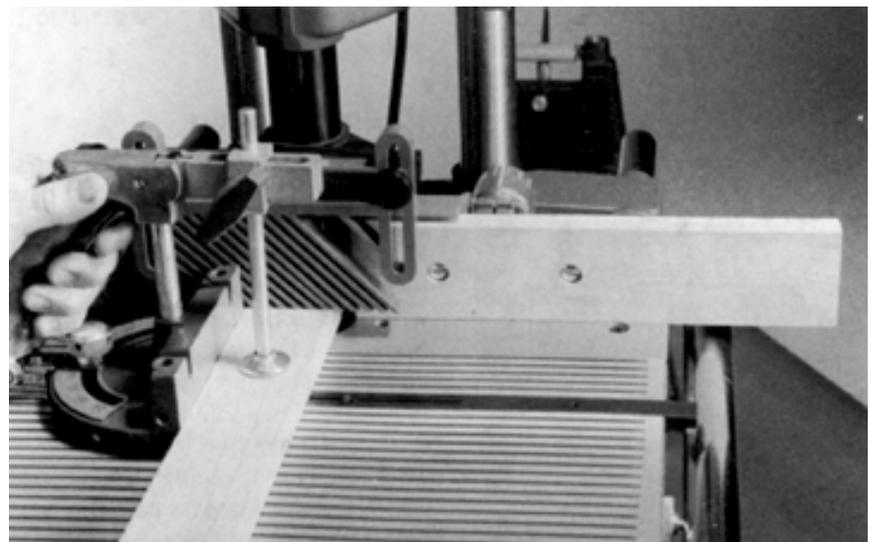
Unless the workpiece is wide enough to provide sufficient bearing surface against the fence boards, make all cross-grain cuts with the miter gauge and safety grip.
